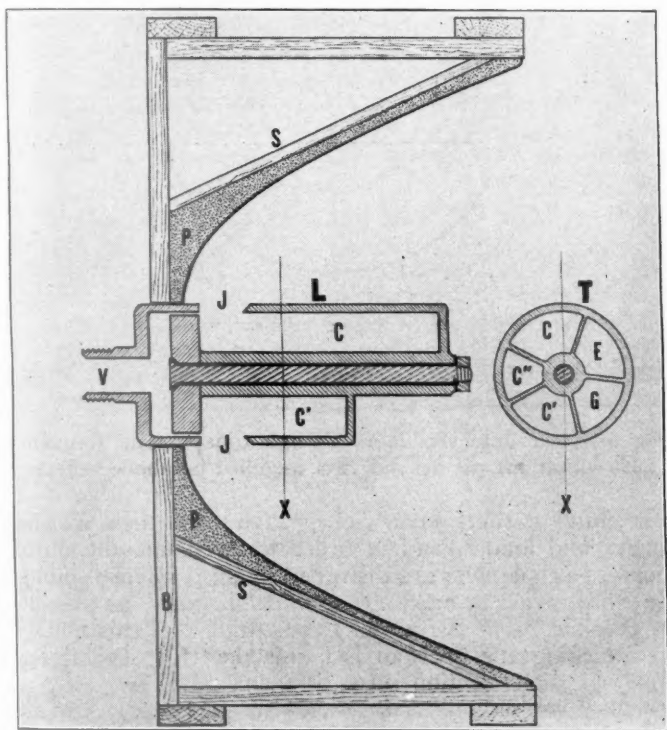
Transverse and longitudinal sections of a chime whistle modified parabolic reflector
